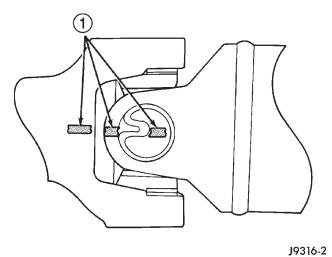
Align Propeller Shaft And Rear Axle Yokes
